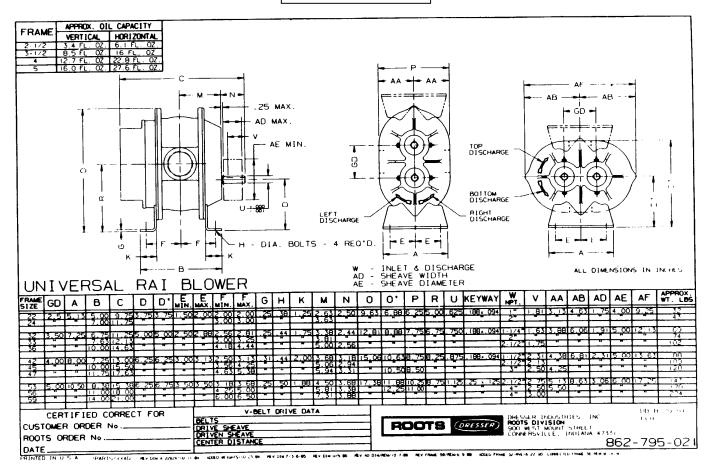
Dimensional Assembly of UNIVERSAL RAI® Blower (2 1/2" - 5")
